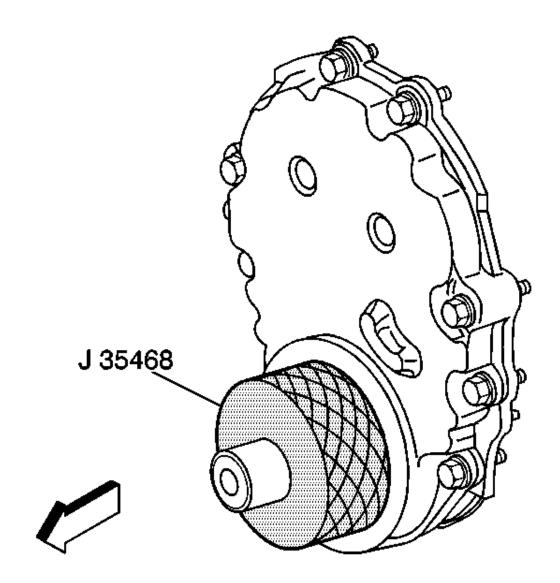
View Of J 35468 Installing The Crankshaft Front Oil Seal Courtesy of GENERAL MOTORS CORP.
